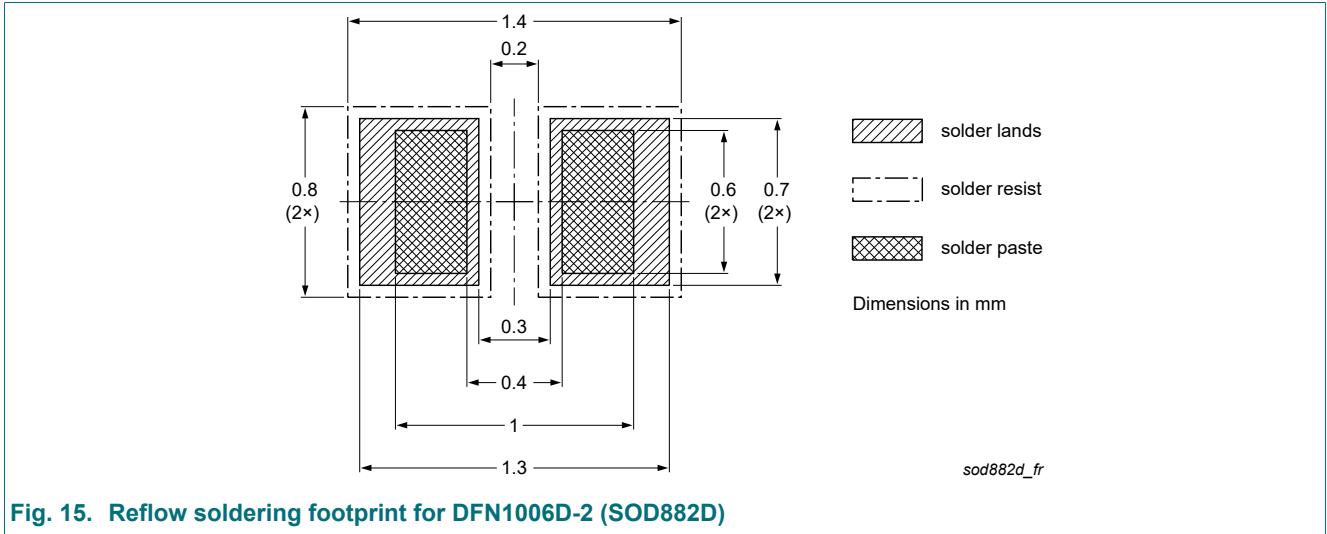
Reflow soldering footprint for DFN1006D-2 (SOD882D)
